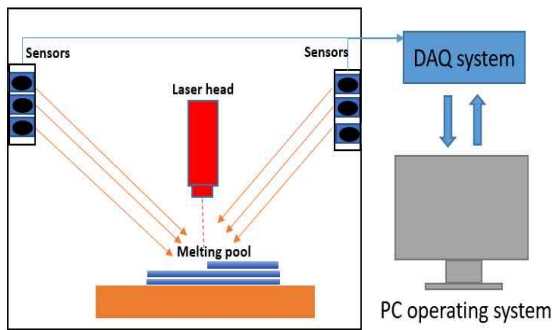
Placement of set of sensors to the metal printer and type of used sensors
